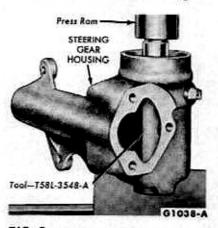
Steering Shaft Lower Bearing Cup Installation
